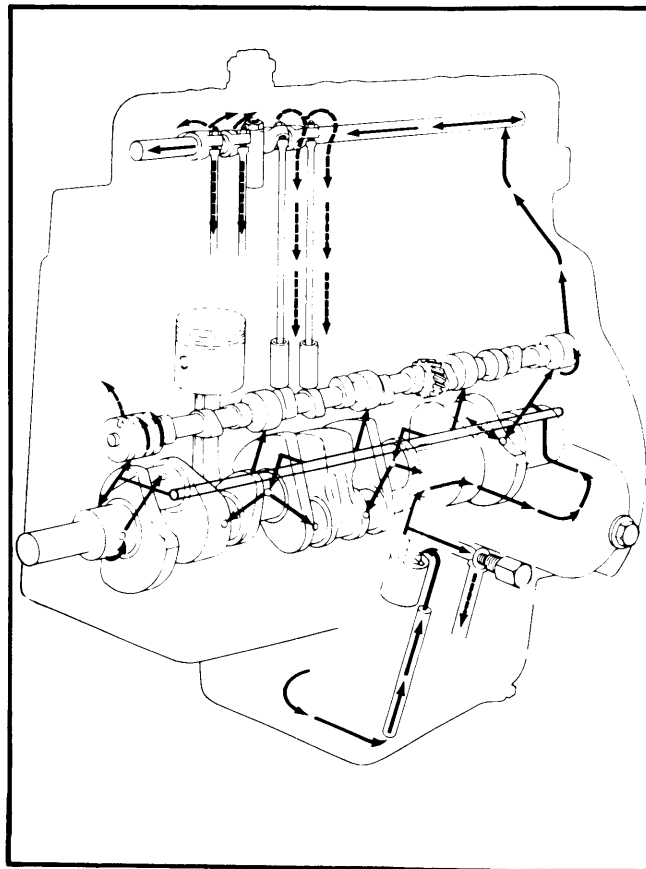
Schematic Showing Direction of Engine Oil Flow
